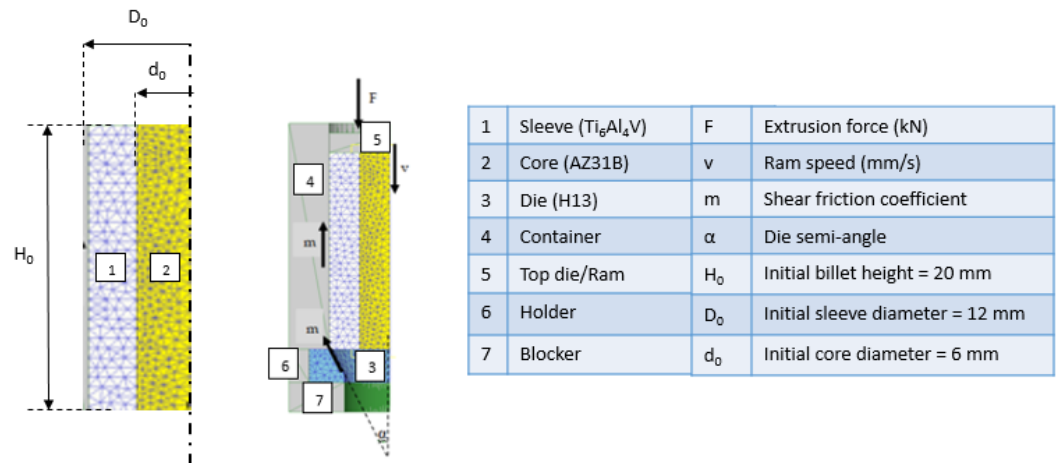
Co-extrusion set up with process parameters and initial billet dimensions
